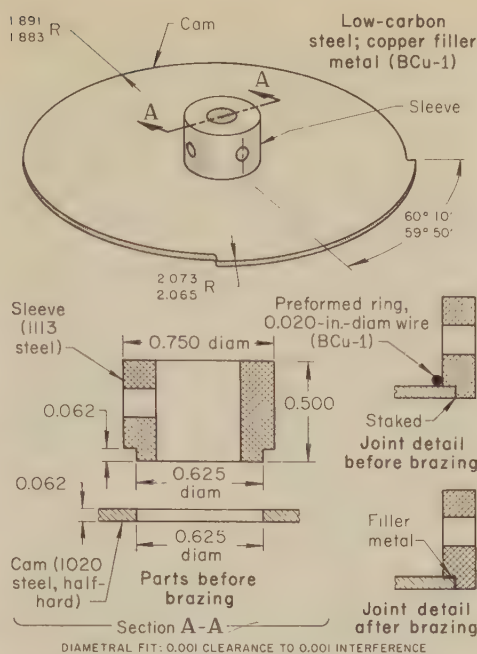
Cam-and-sleeve assembly that was furnace brazed using copper filler metal, to minimize warpage and eliminate use of flux (Example 548)
